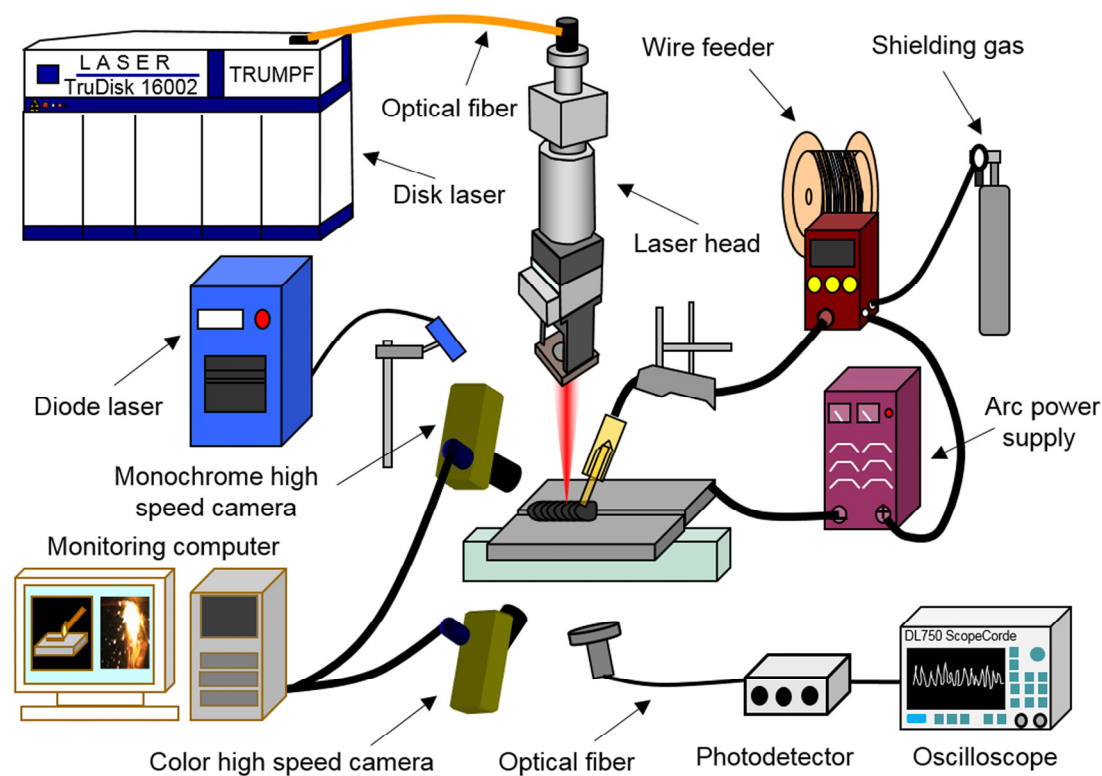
Schematic experimental setup of laser-arc hybrid welding.
